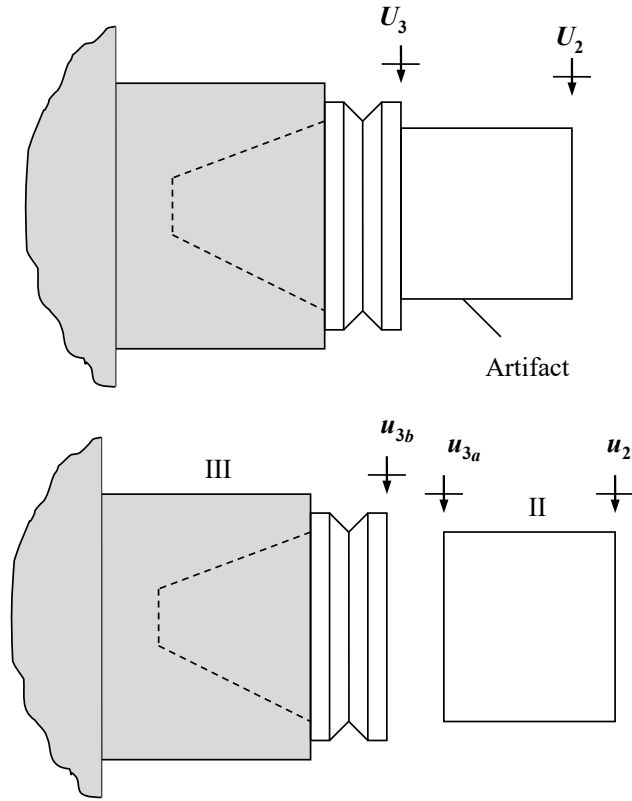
Artifact-spindle-machine model. (Top) assembly. (Bottom) components.
